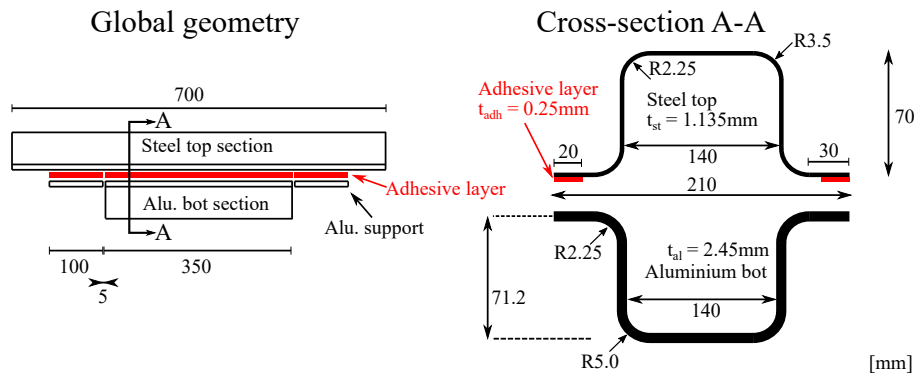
Detailed overview of the global and cross-section geometry of the bonded component test.
